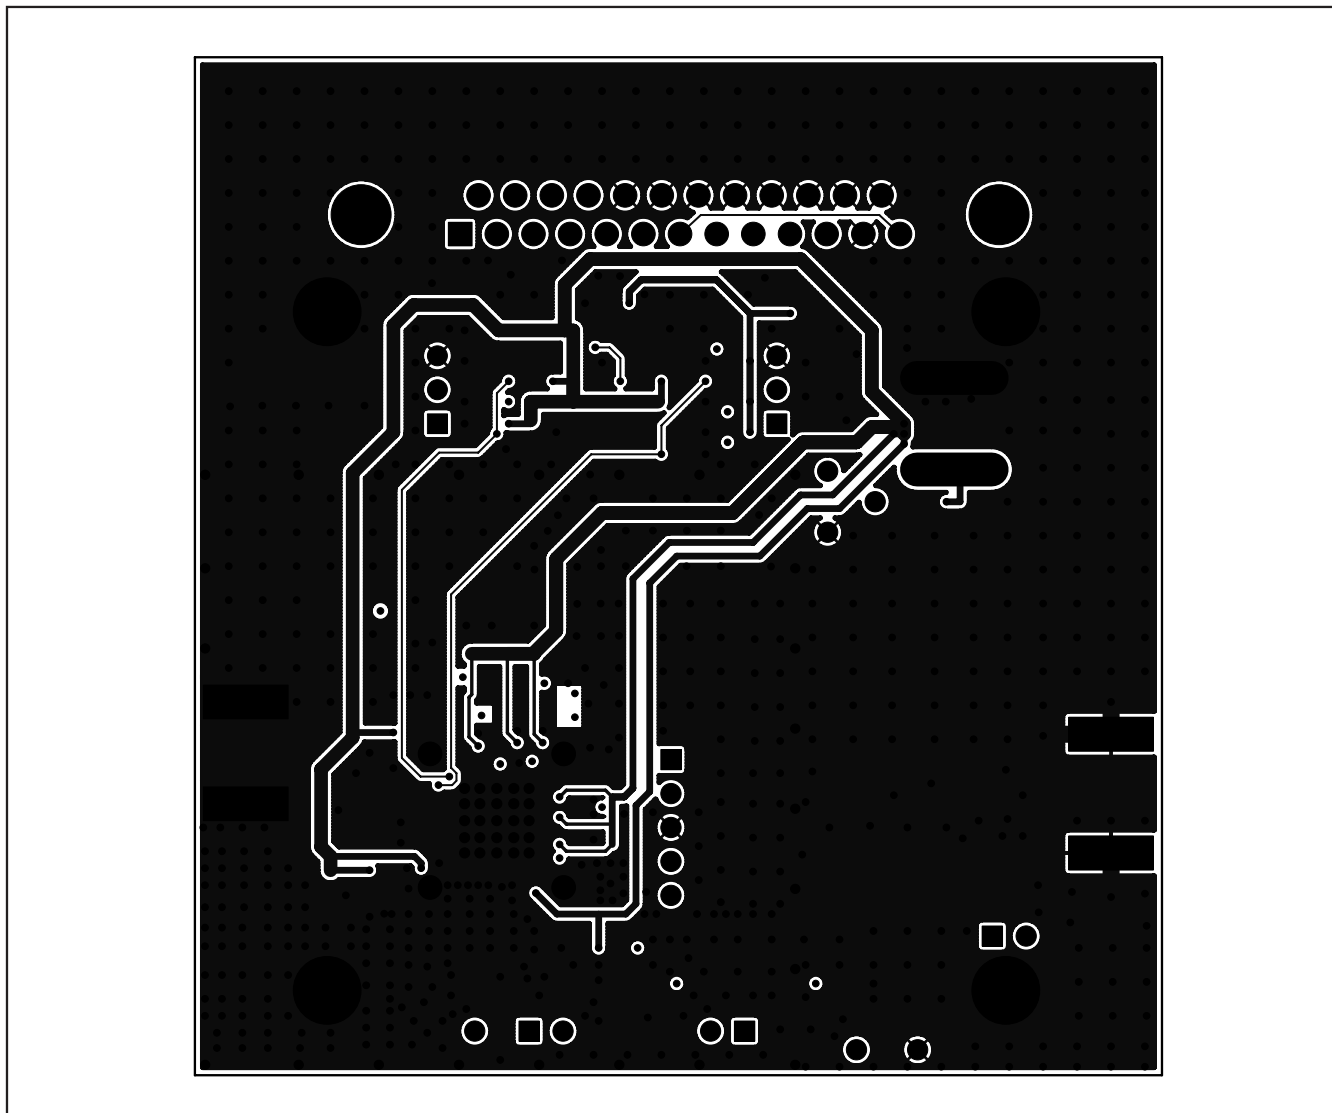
MAX3541/MAX3542 EV Kits PCB Layout—Secondary Component Side
